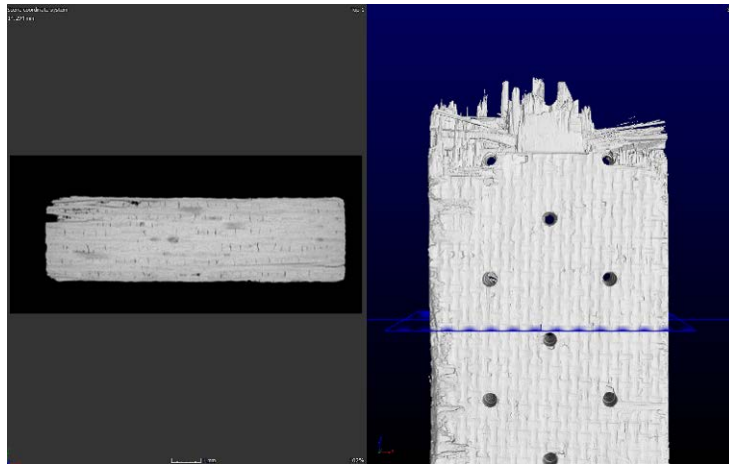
Step 5 – 2D (x-y plane) vs 3D location for specimen #3, tested in tension to failure at 1200°C in air
